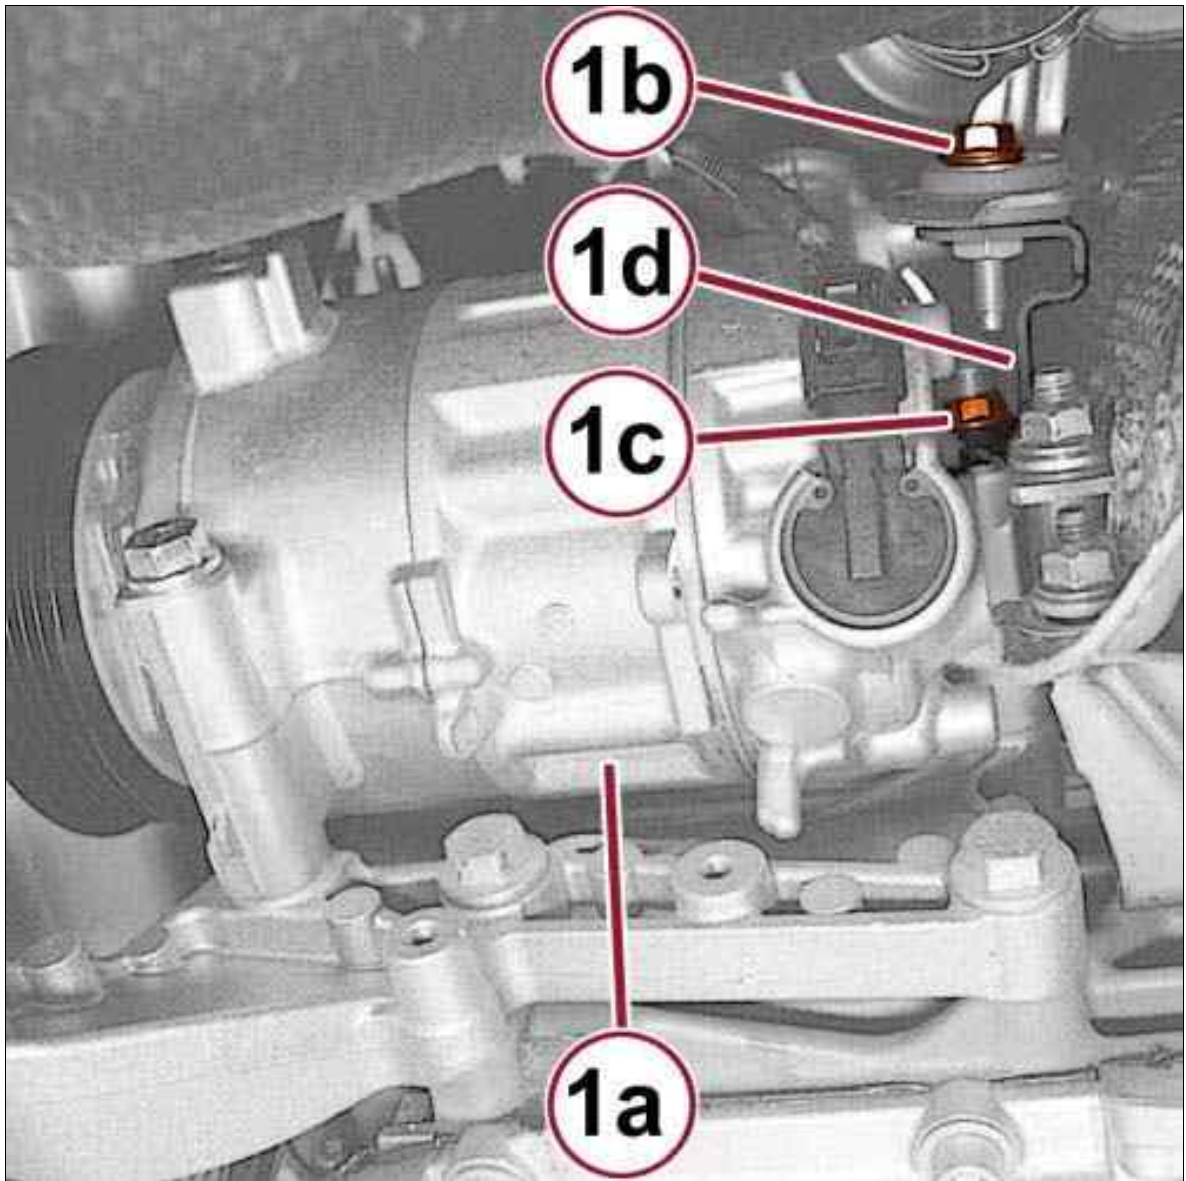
Compressor, Hose, Retaining Clip & Coupling
